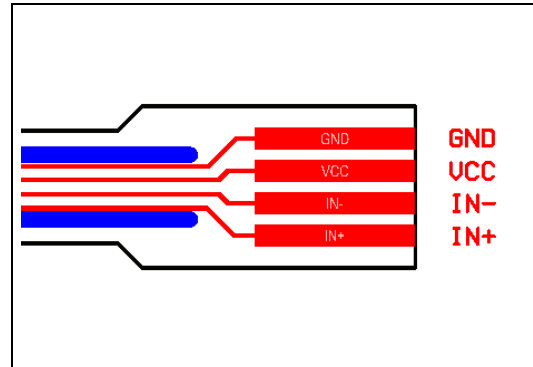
schematic of the flexible pcb end (FFC 4 points 1 mm)
